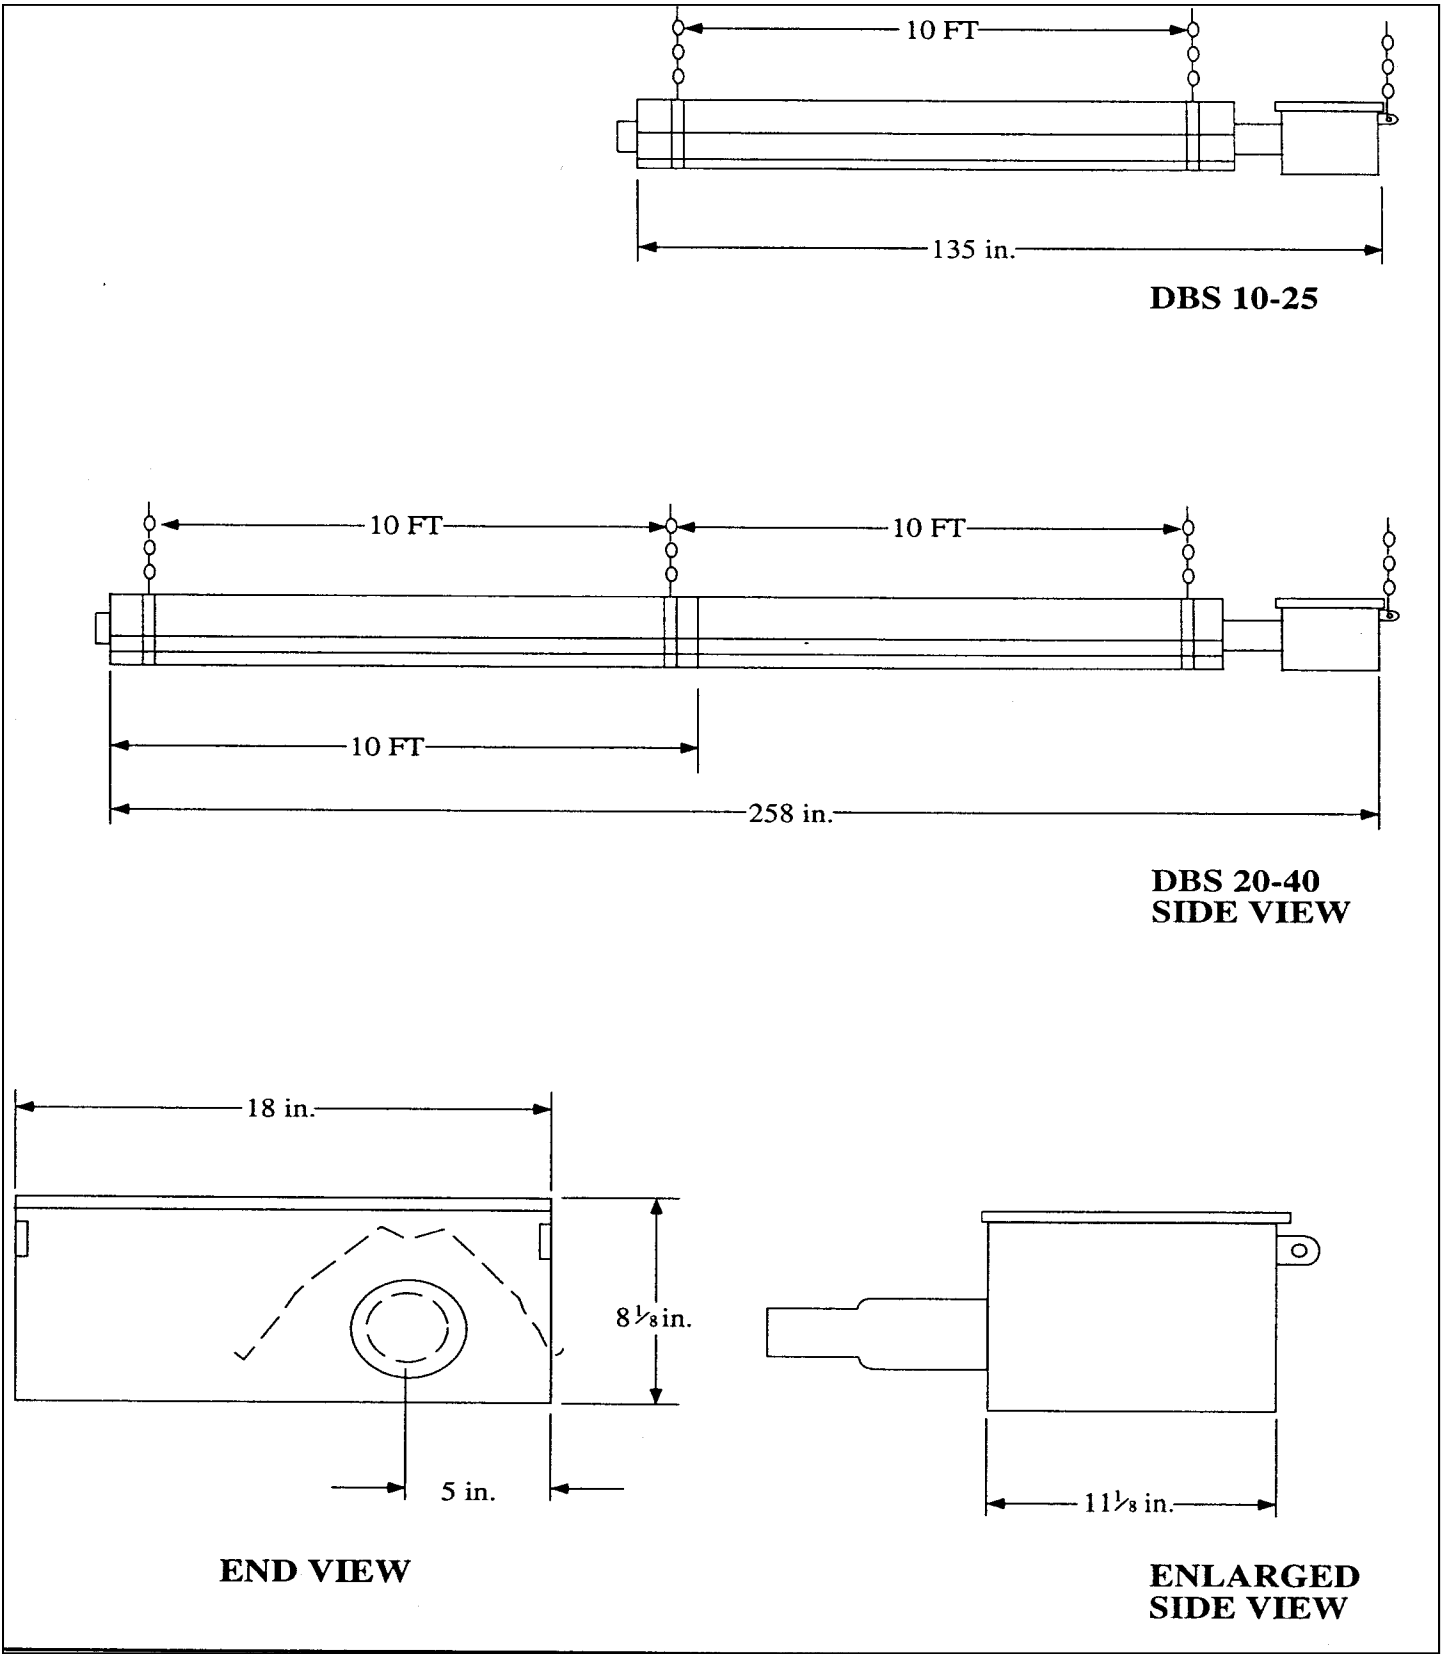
Dimensions for Side View and End View of Model DBS 10-25 and DBS 20-40
